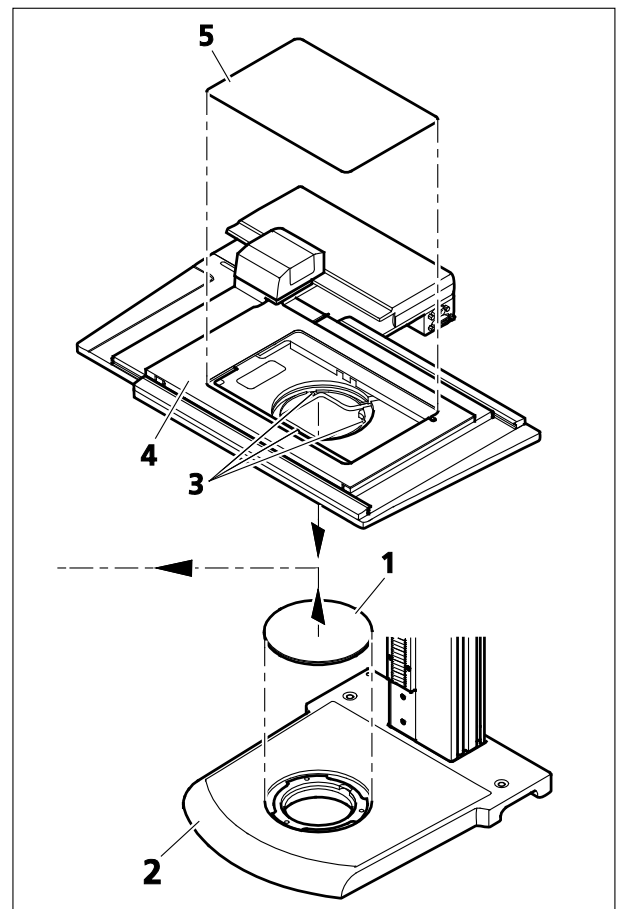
Mounting the mechanical / measuring stage mot. on base 300
